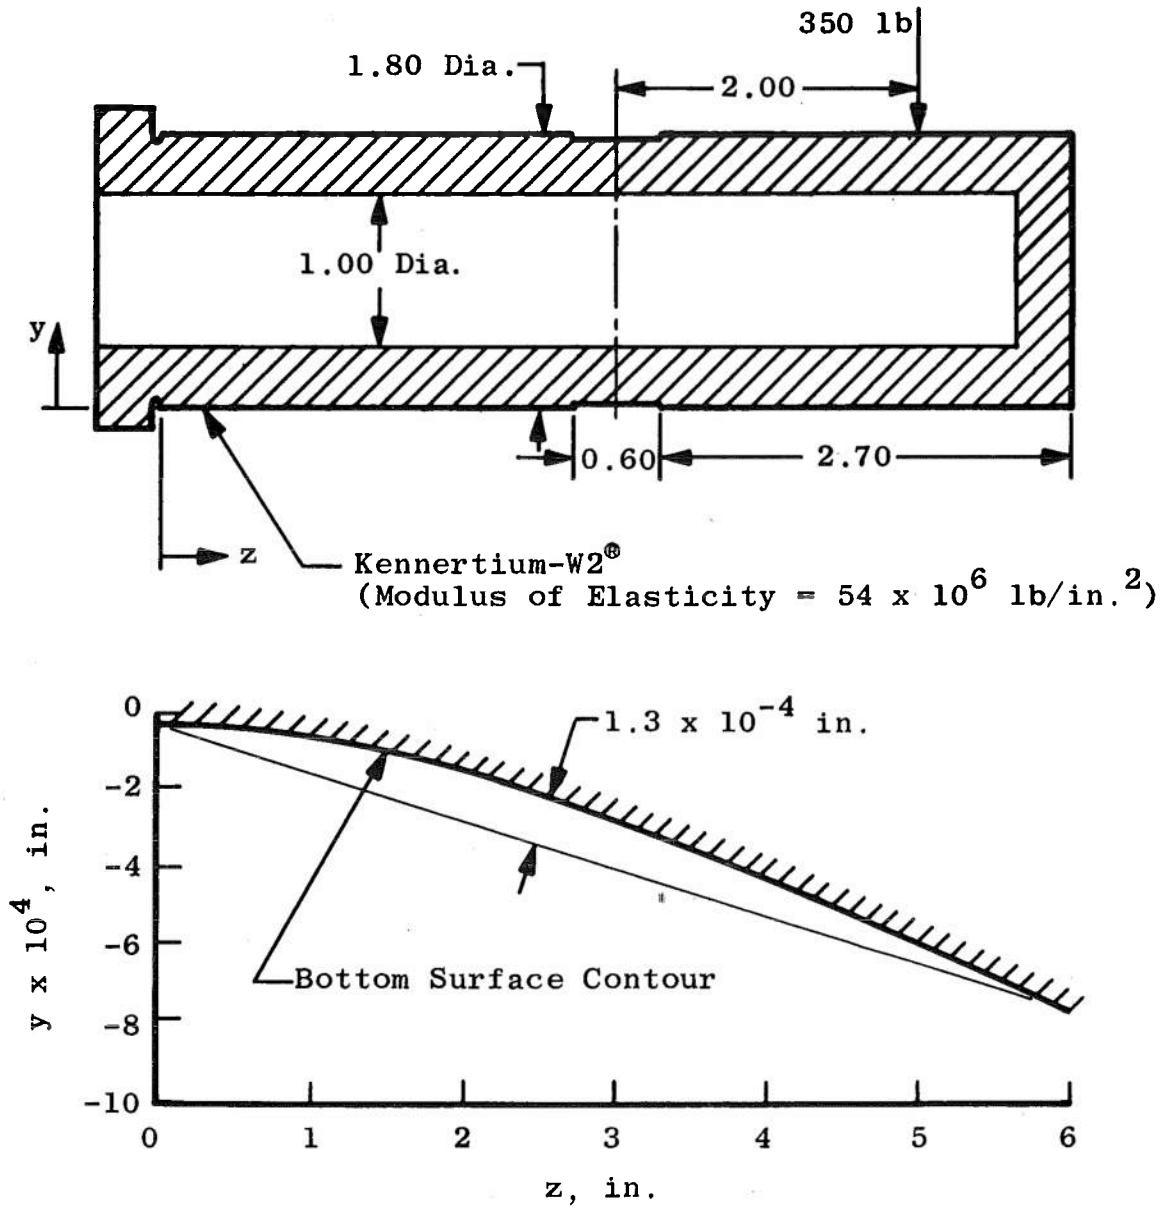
Surface Deflection of Journal Bearing Inner Race with Maximum Loading.
